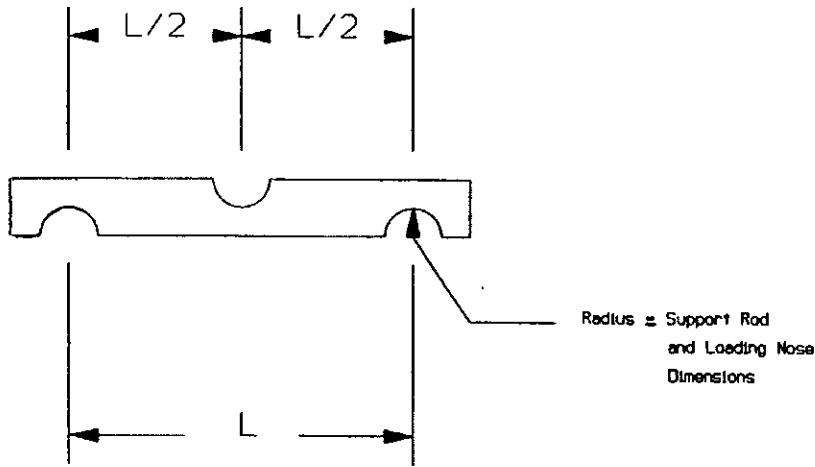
Fixture Used to Set Loading Nose and Support Spacing and Alignment
